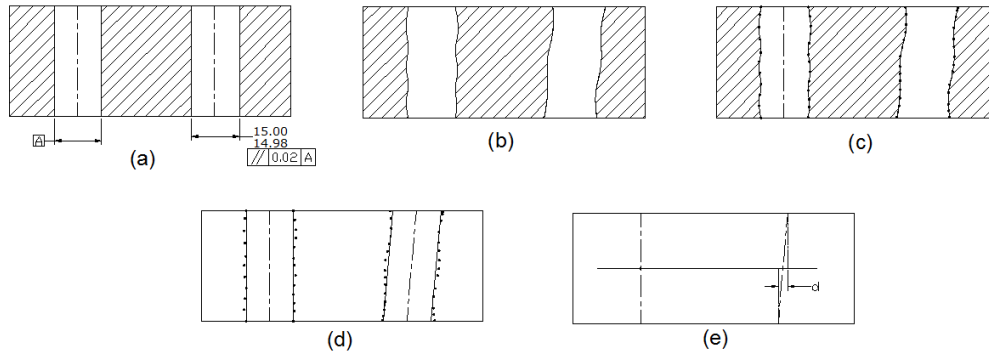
Measurement of Parallelism of a Cylinder Parallel to a Cylindrical Datum
